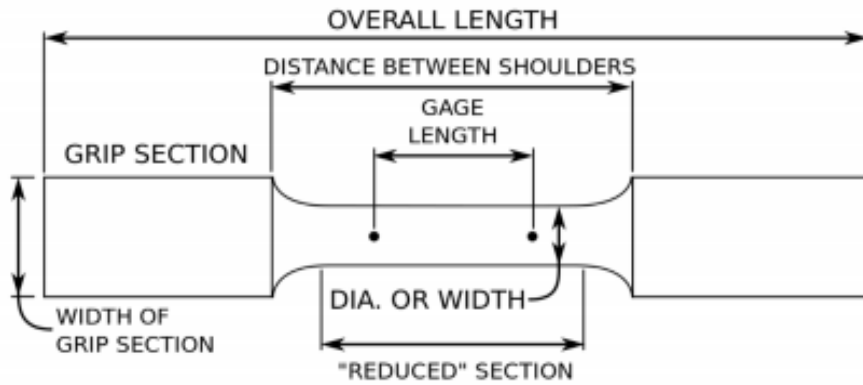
drawing of tensile test sample manufactured in compliance with ASTM-E8-04
